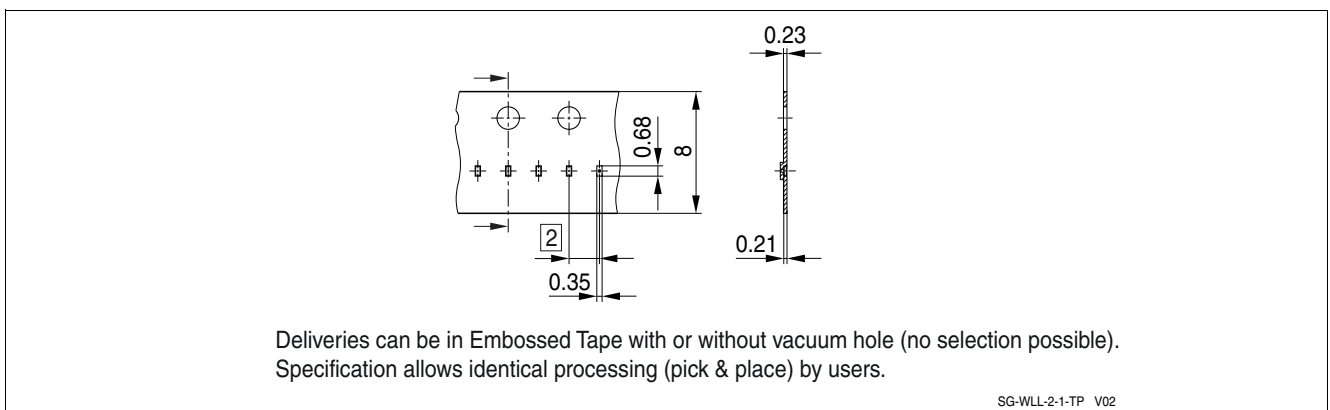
WLL-2-1 Packing (dimension in mm)
